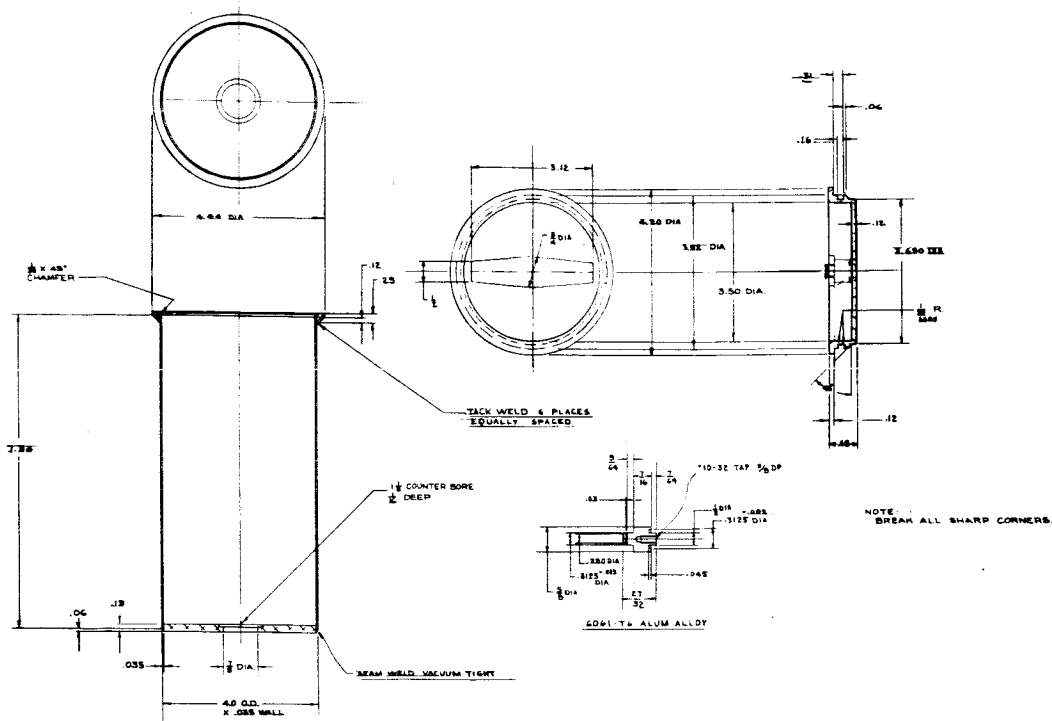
ASSEMBLY DRAWING OF WATER-RECOVERY TYPE FECAL COLLECTOR
